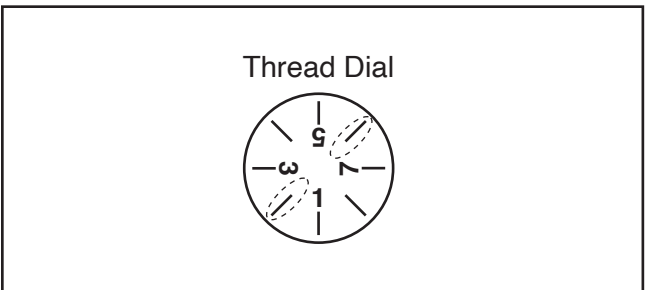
Using thread dial for 9.5 or 11.5 TPI threads.
